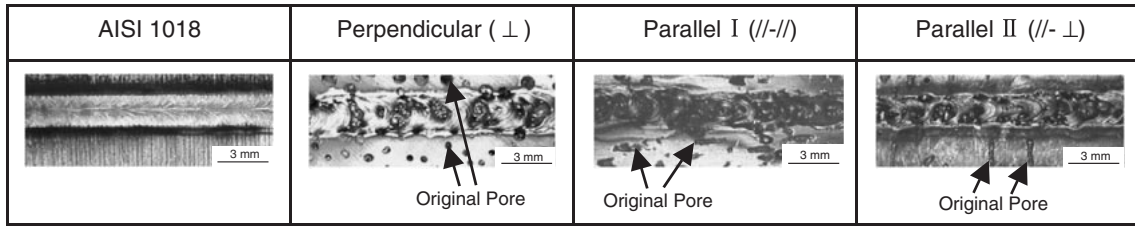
Appearance of laser weld beads on the nonporous iron (AISI 1018) and lotus-type porous iron; pore directions perpendicular (\perp), parallel I ($//-/$), and parallel II ($//\perp$) to the specimen surface at a laser power of 1.0kW and welding speed of 1 m/min.
